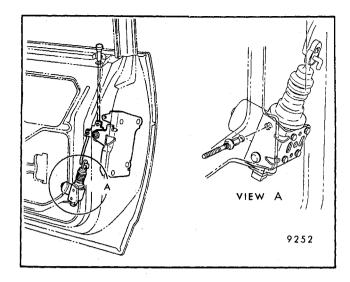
Power Door Lock Actuator - Typical Installation
